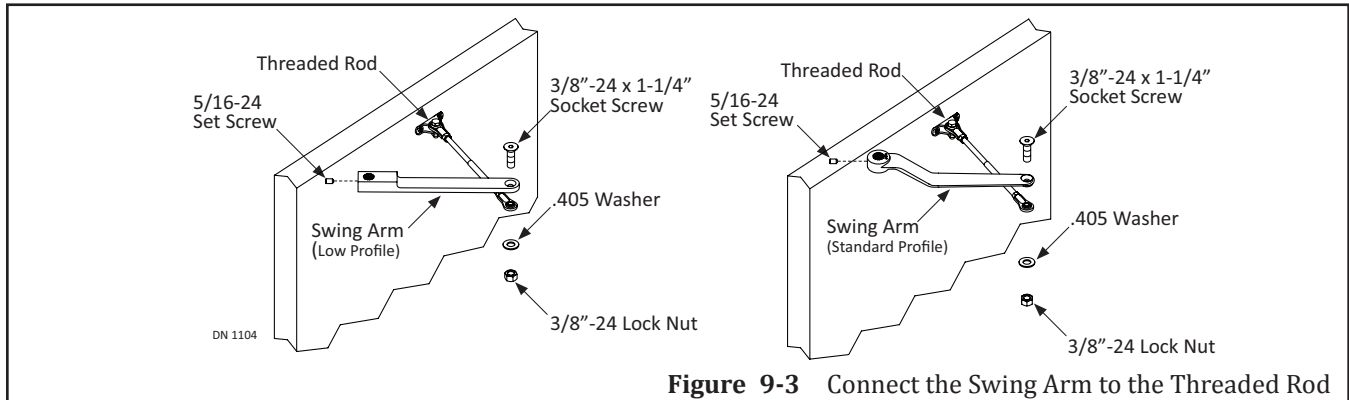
Connect the Swing Arm to the Threaded Rod
